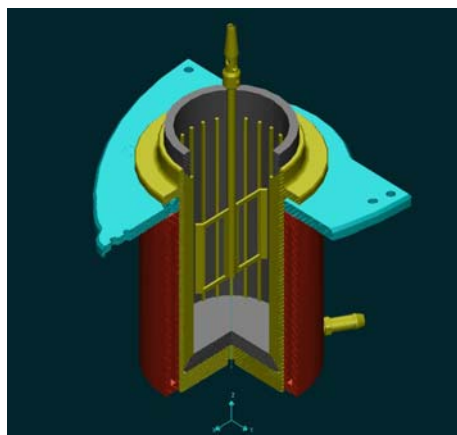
Cross-section of the measuring cell for building materials with adapter plate, temperature control unit incl. vane rotor
